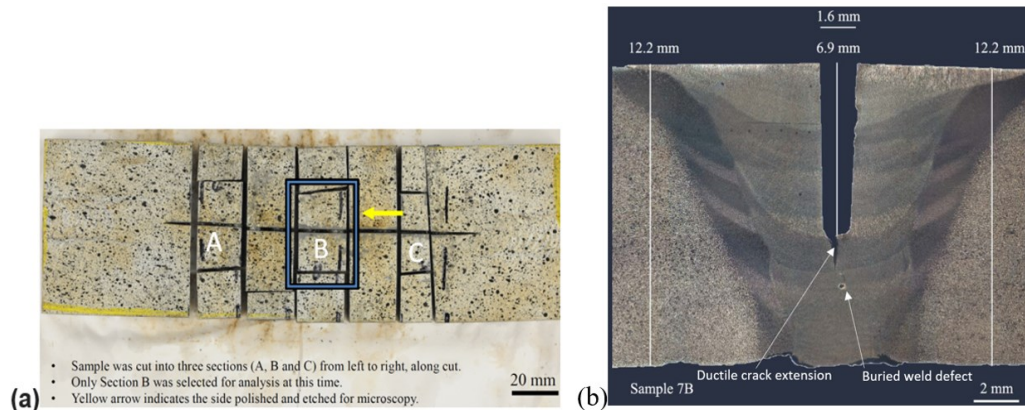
(a) Specimen 7 sample cut into three sections for analysis, (b) Details of flaw dimensions and etched weld microscopy of section B.
